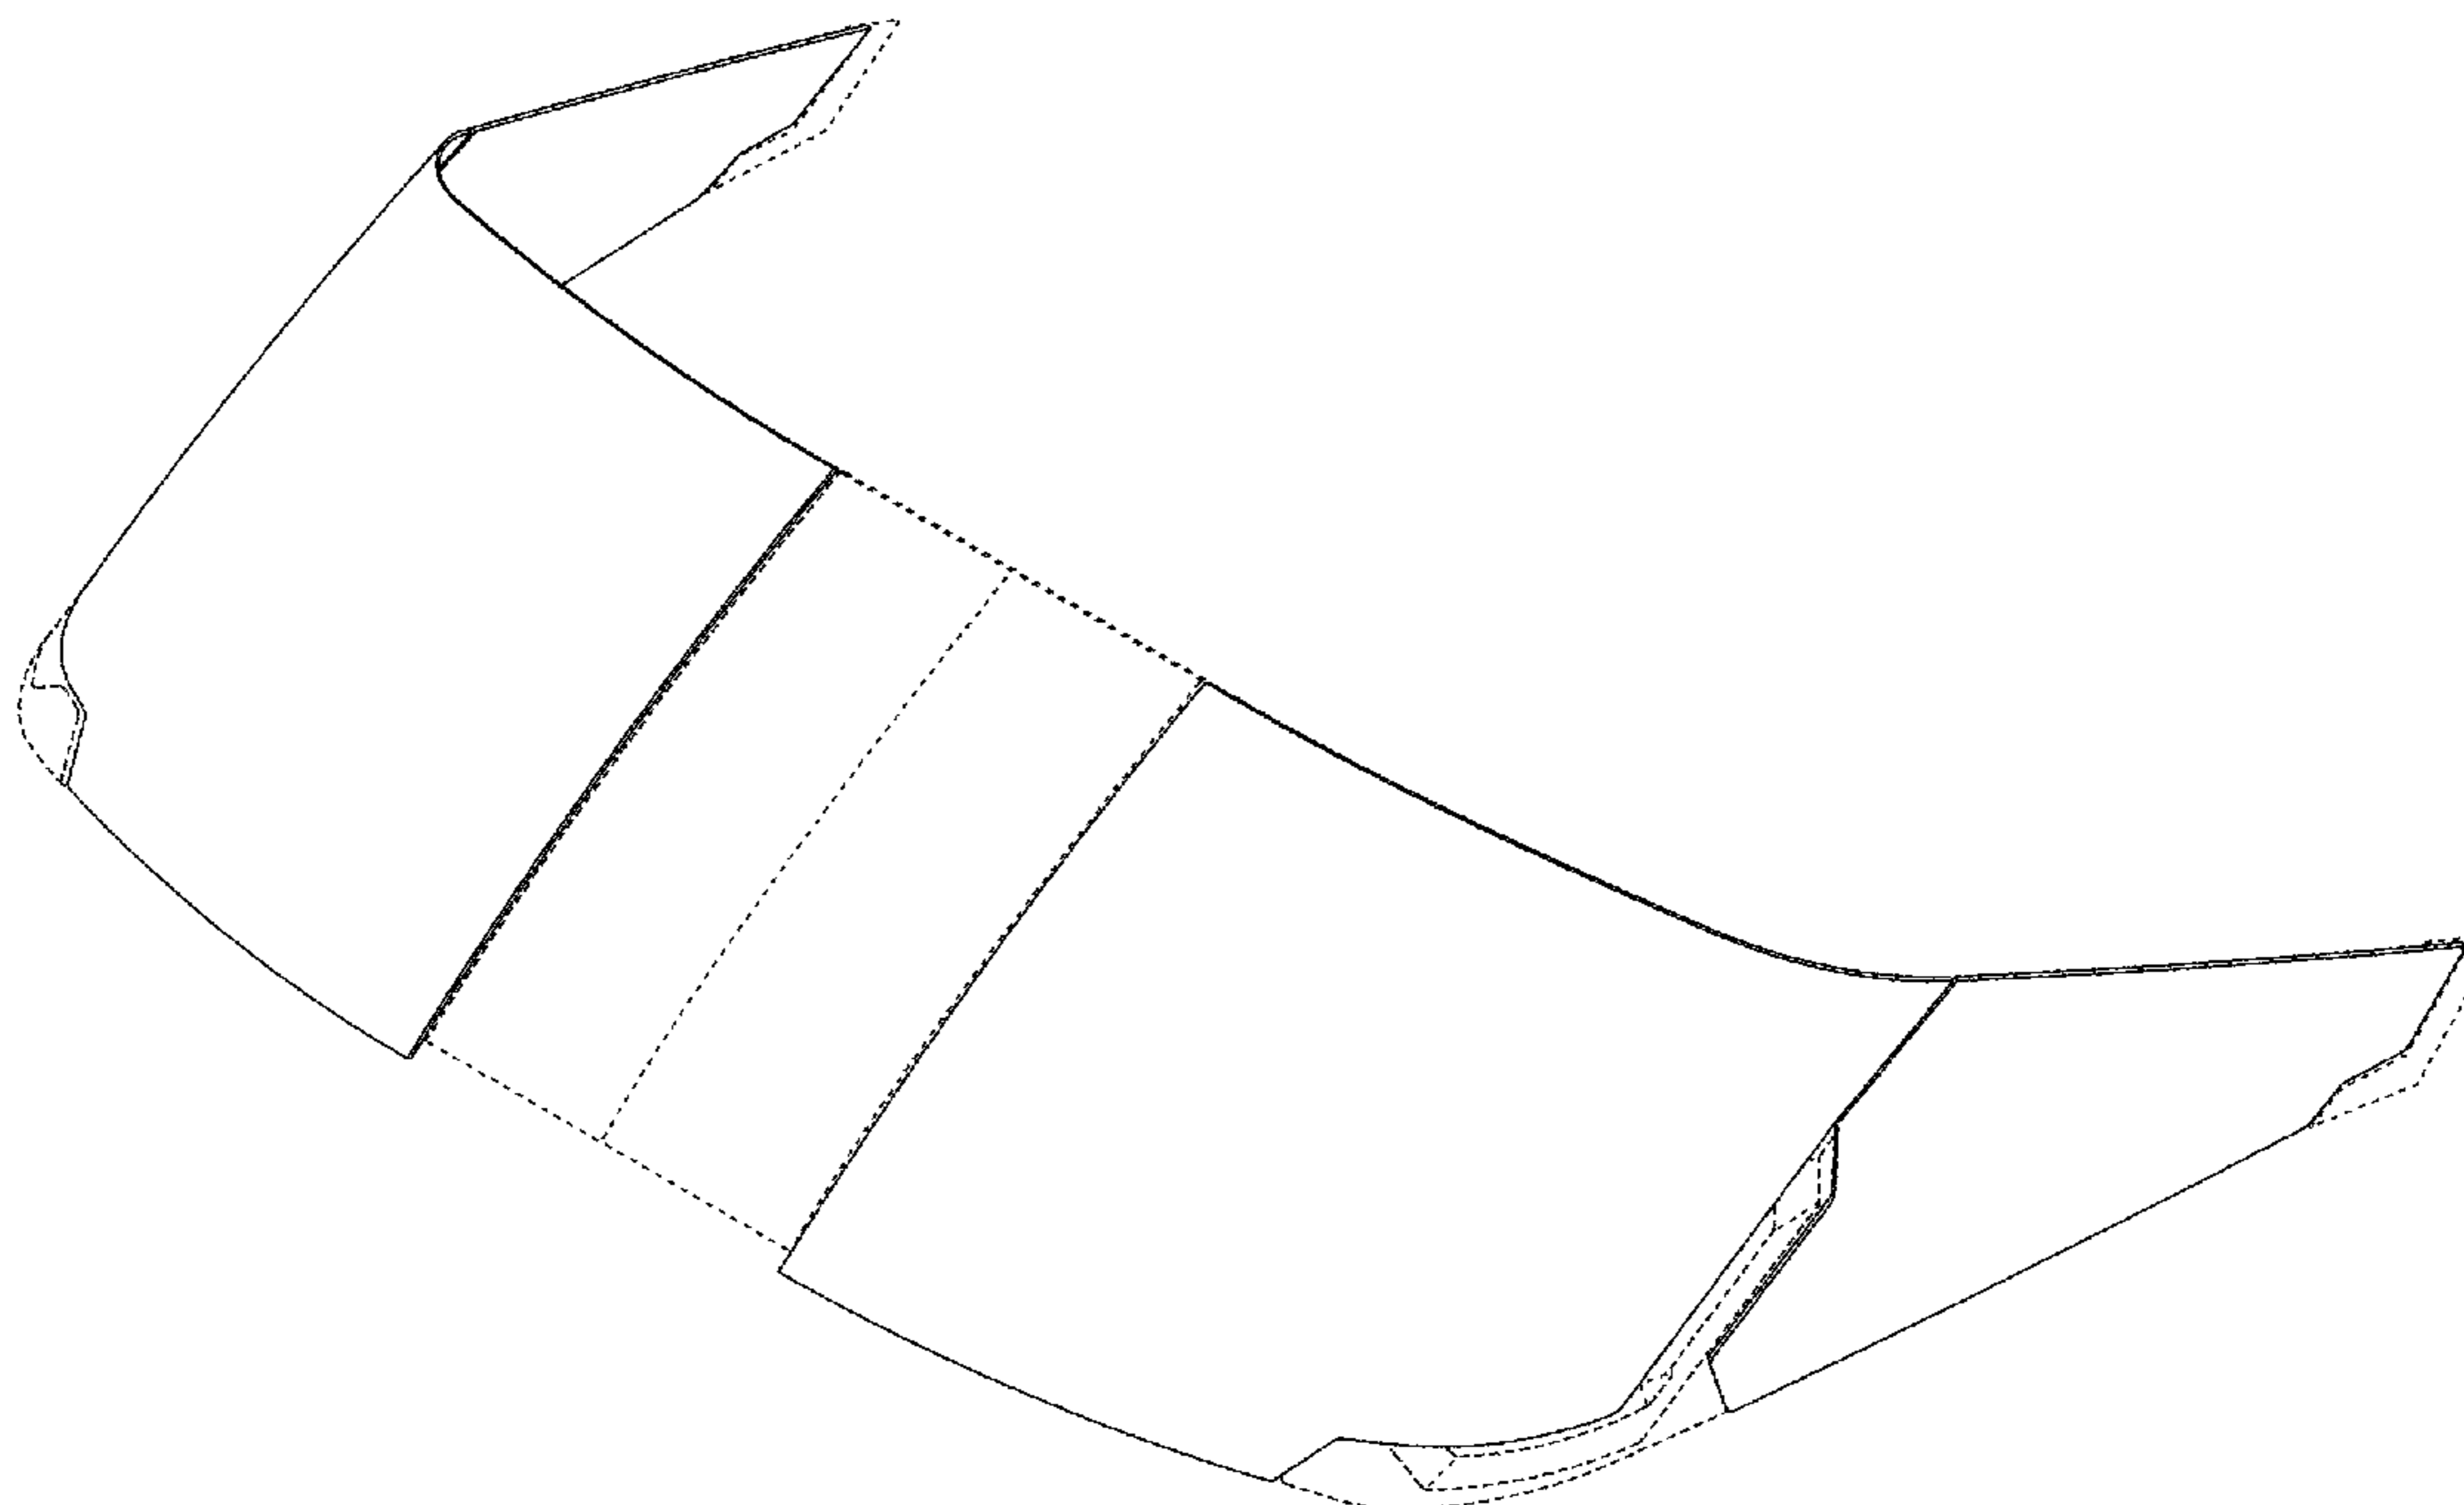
is a front perspective view showing the exterior of a boat windshield;
